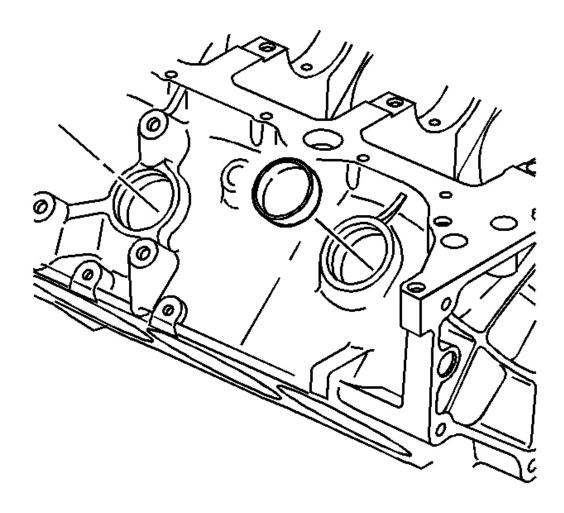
Engine Block Core Hole Plugs Courtesy of GENERAL MOTORS CORP.
